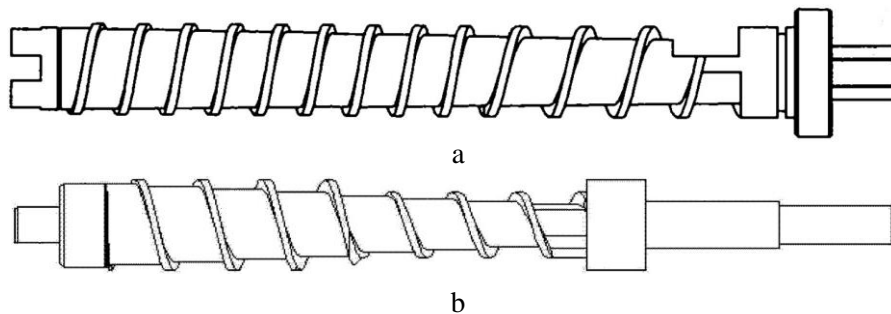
Improved screw core in its feed section: a – Patent No. CN204340262U; b – Patent No. CN202826482U
